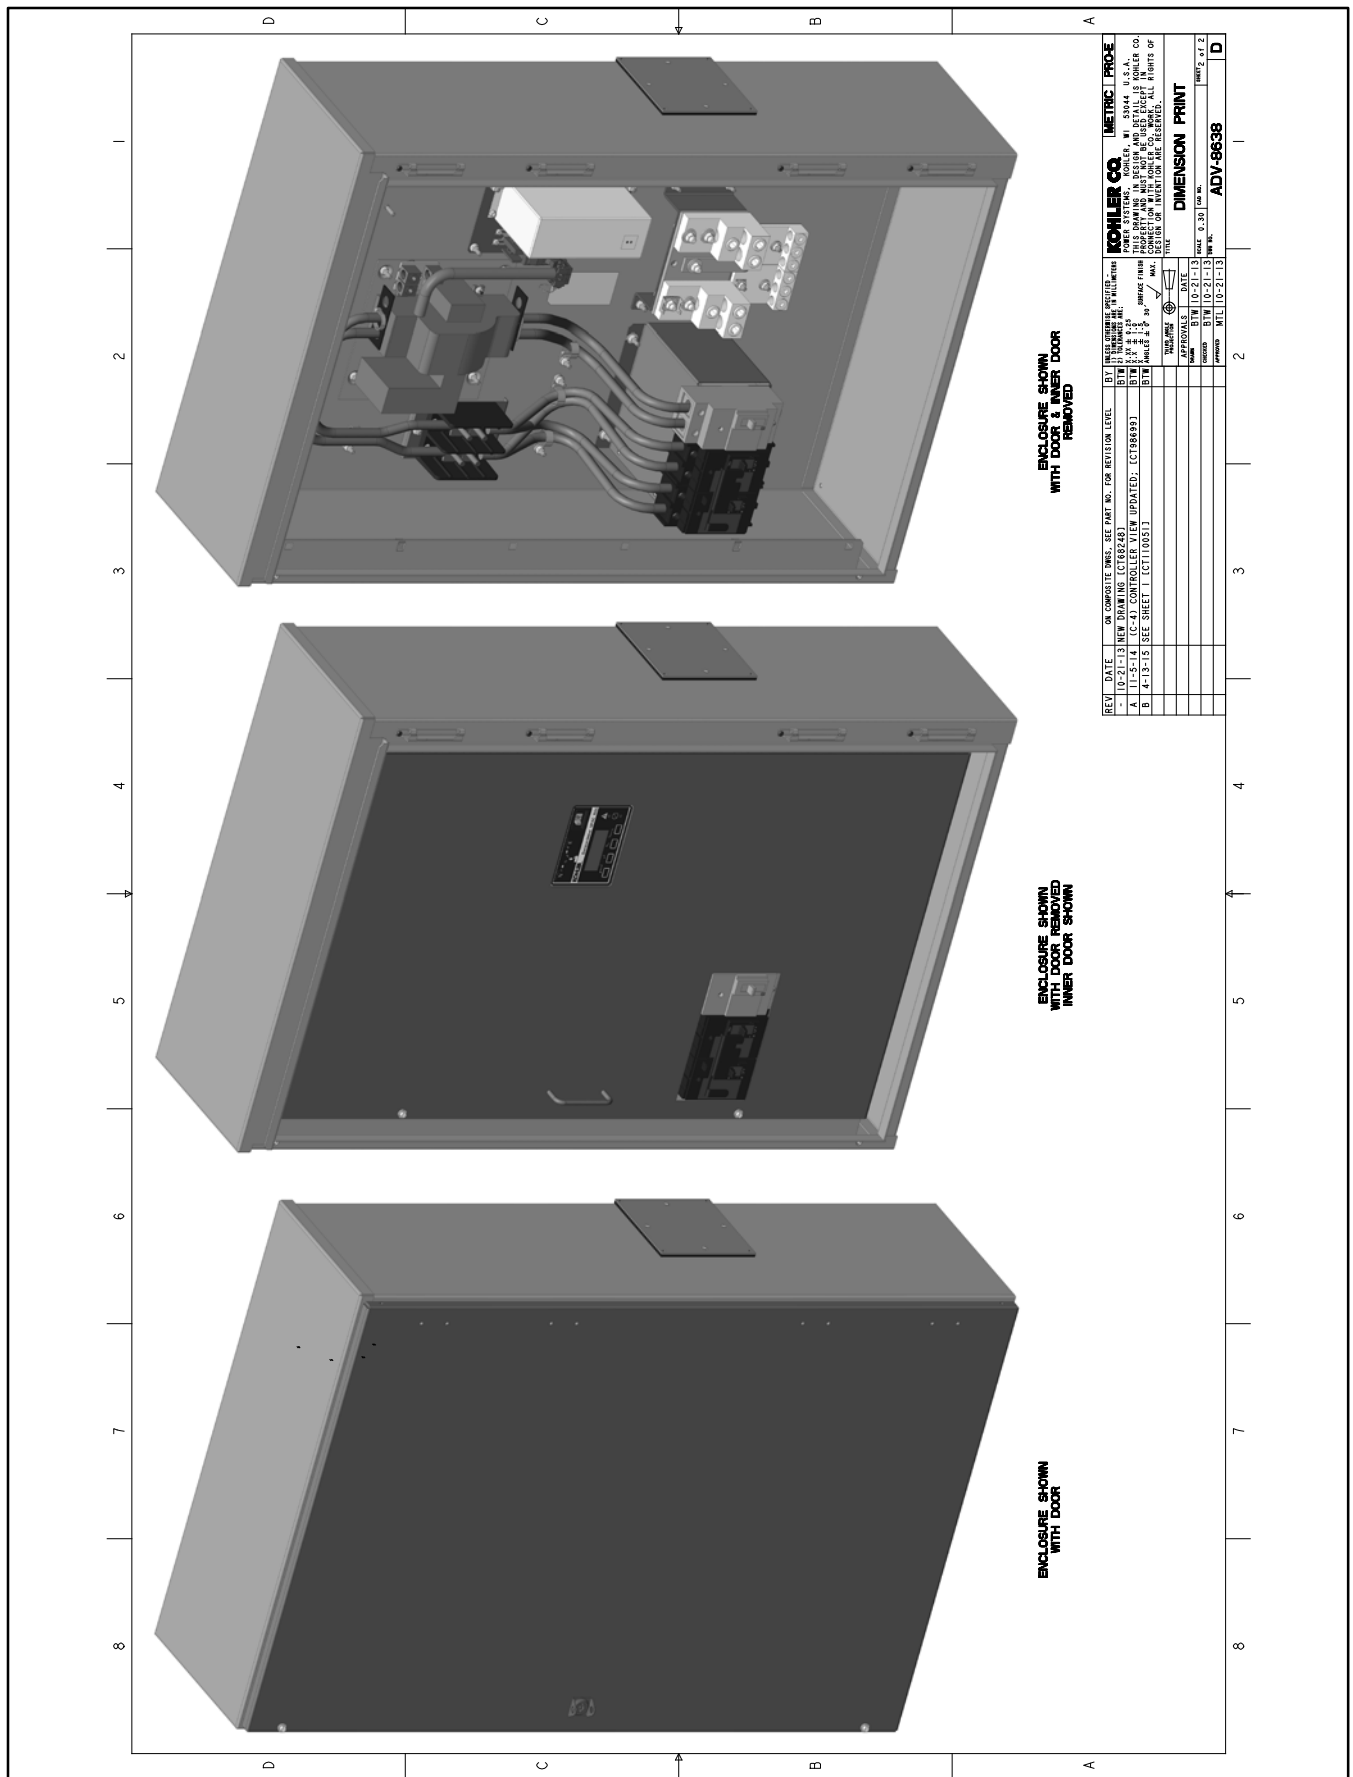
Transfer Switch Dimension Drawing, ADV-8638, Sheet 2
